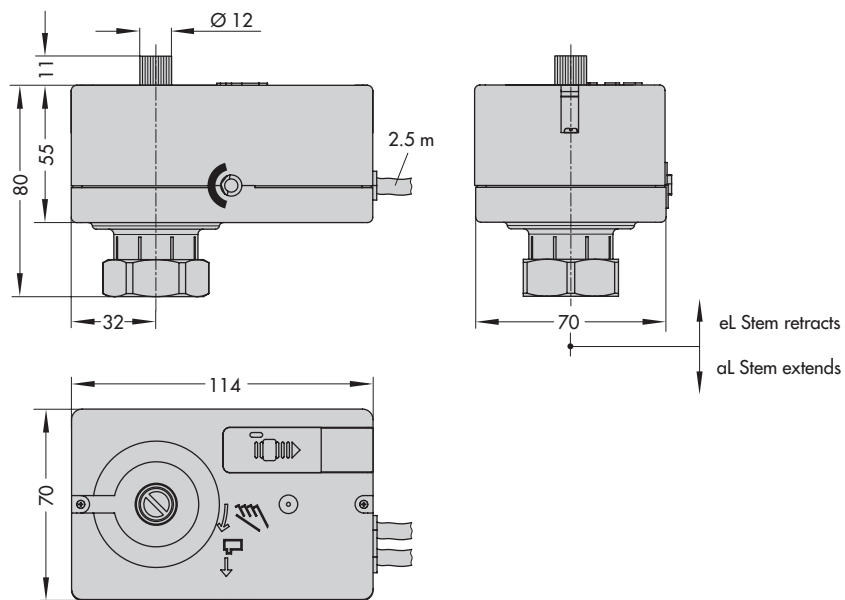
Dimensions in mm · TROVIS 5757-3 Electric Actuator with Process Controller
